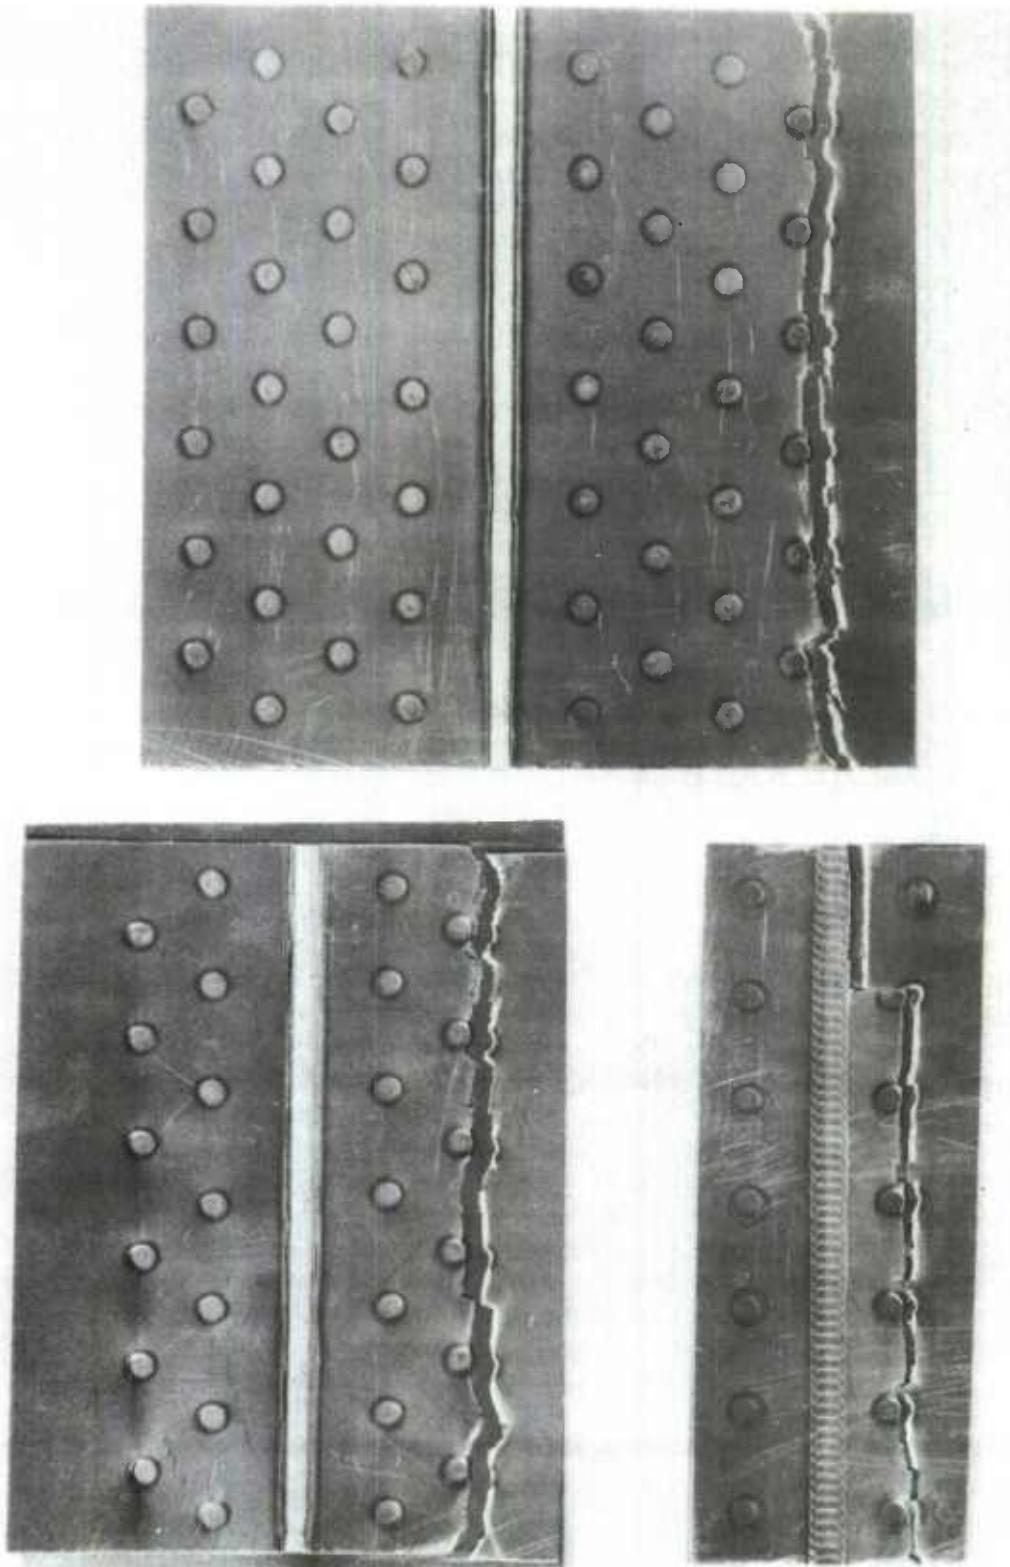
Fractured Fatigue Specimens - AM-355 SS (78° F)
